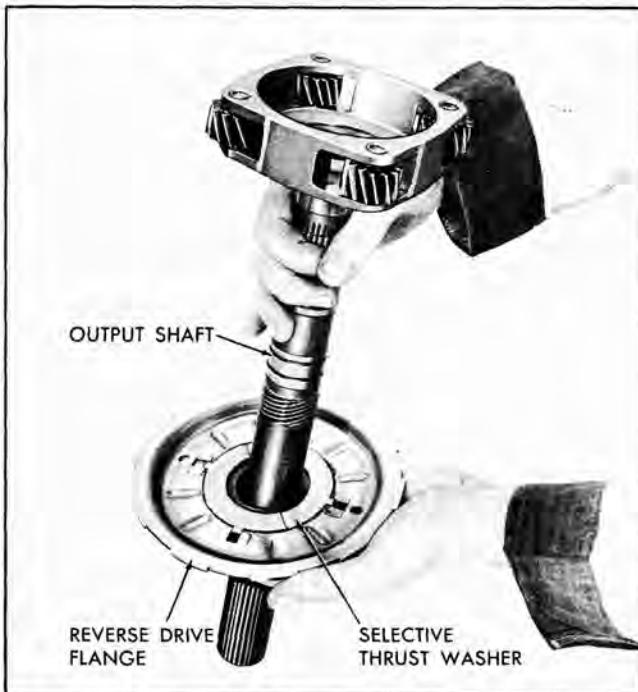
Assembling Reverse Drive Flange to Output Shaft
